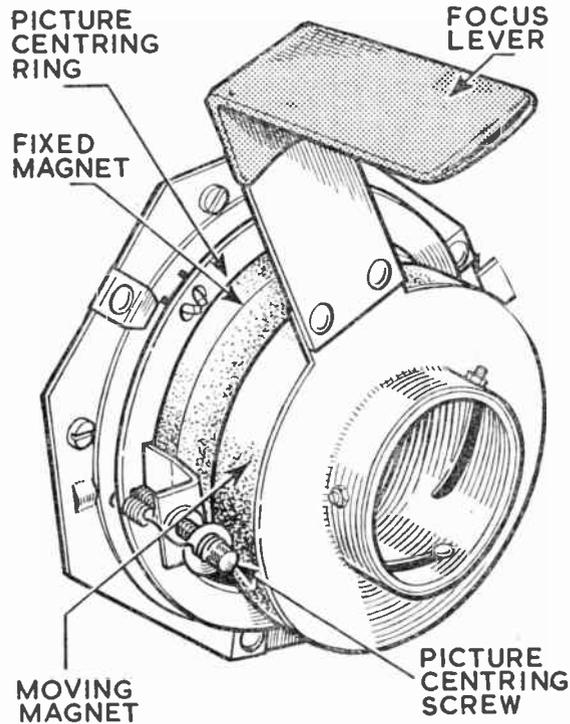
A ring magnet focusing assembly with picture shift plate and "screw" type focus lever.
